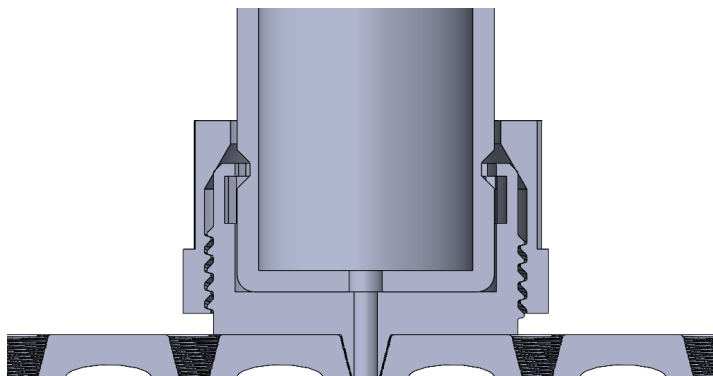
A section view of the tightened locking guide on the plate. Note that the internal mechanism of the module is not shown here.
